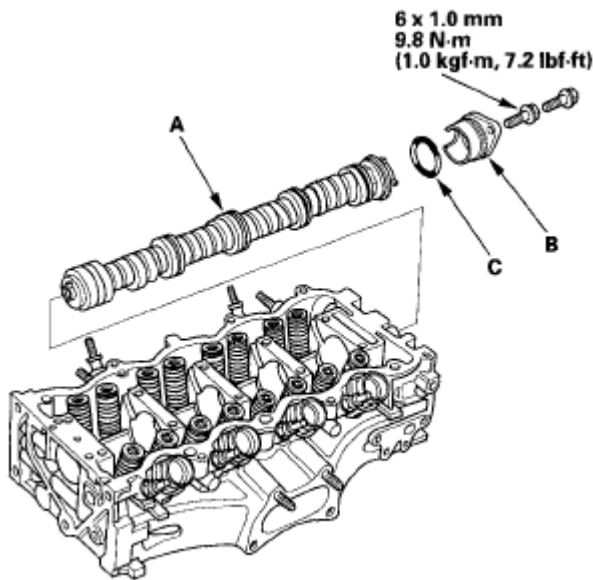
Identifying Camshaft And Camshaft Thrust Cover
